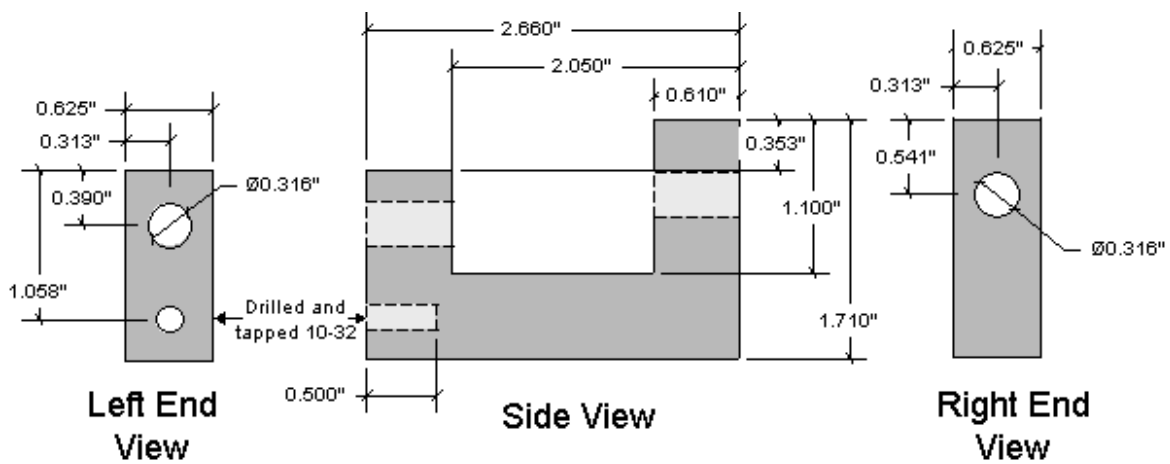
Mechanical Drawing of section 2 of Bus Bar Assembly
